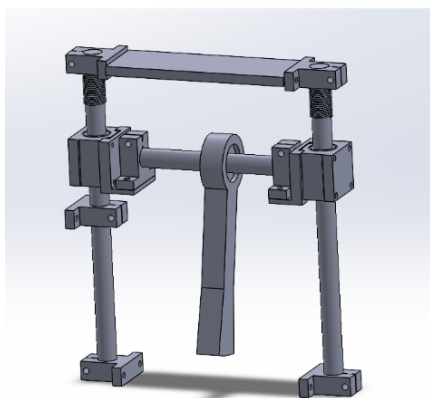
This figure shows a Computer-Aided Design (CAD) model of one of our designs. The stepper motor rail used to carry the sample is not shown here but in our final design, is bolted to the bottom supports and is what the roller piece rests on.
